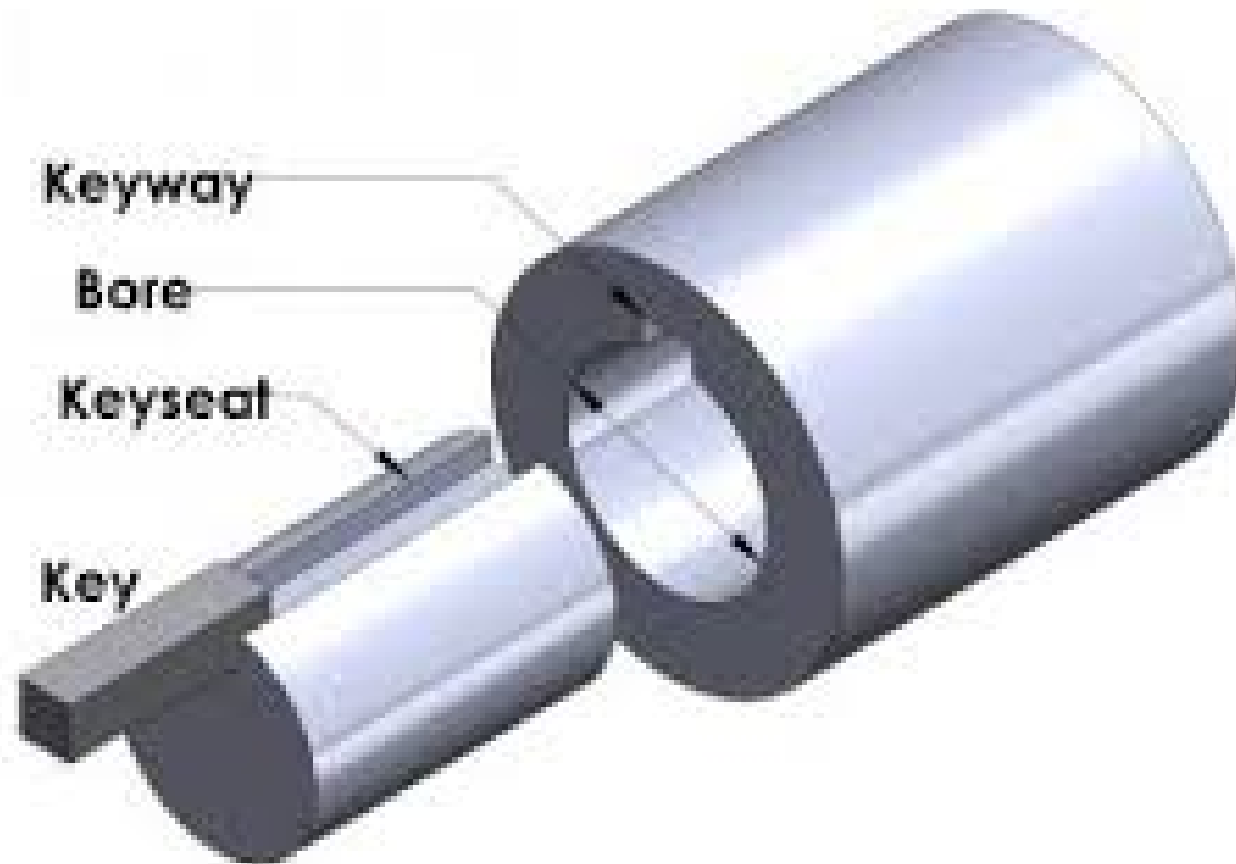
Key fits snugly between bushing and shaft to lock them together radially.
